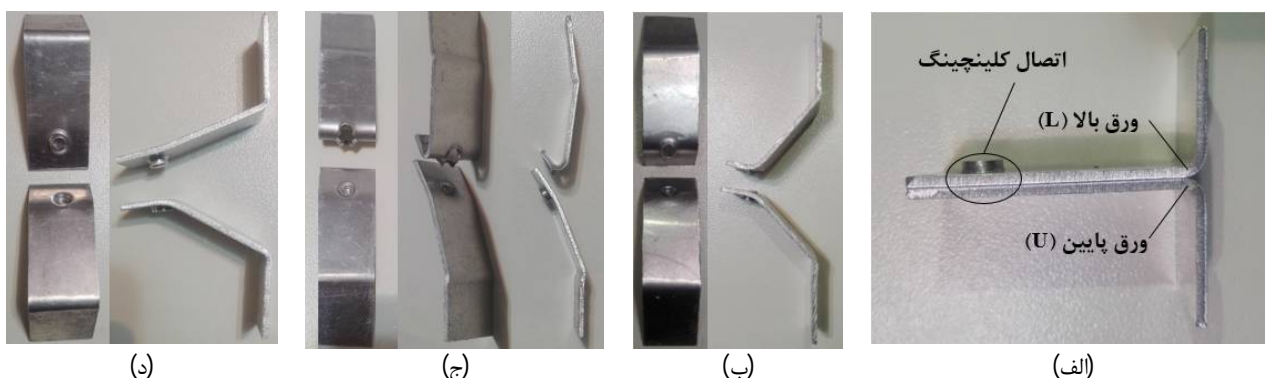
a) Prepared samples for the peel test. Fracture modes: b) and c) fracture form neck thickness, and d) separation from the bottom.
